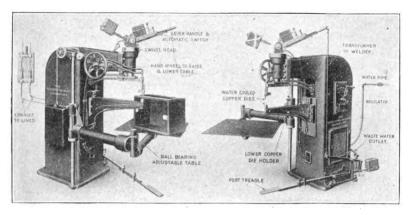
Principal Parts of Spot Welder Courtesy of Toledo Electric Welder Company
